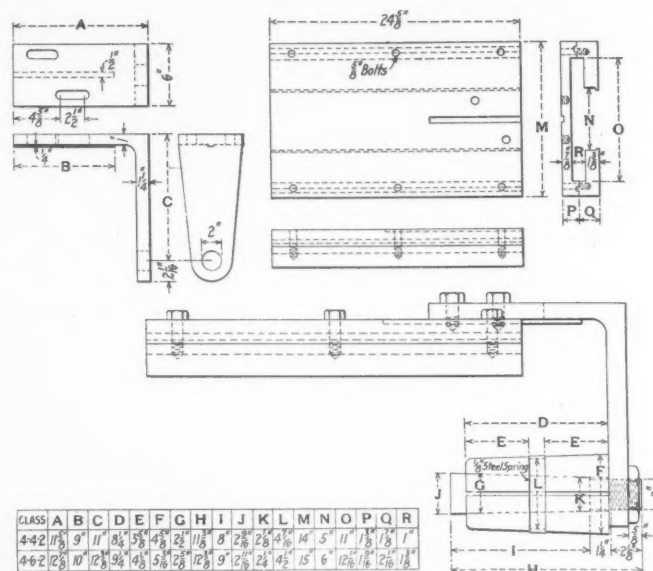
Fixture for Babbitting Suspended Type Crossheads
